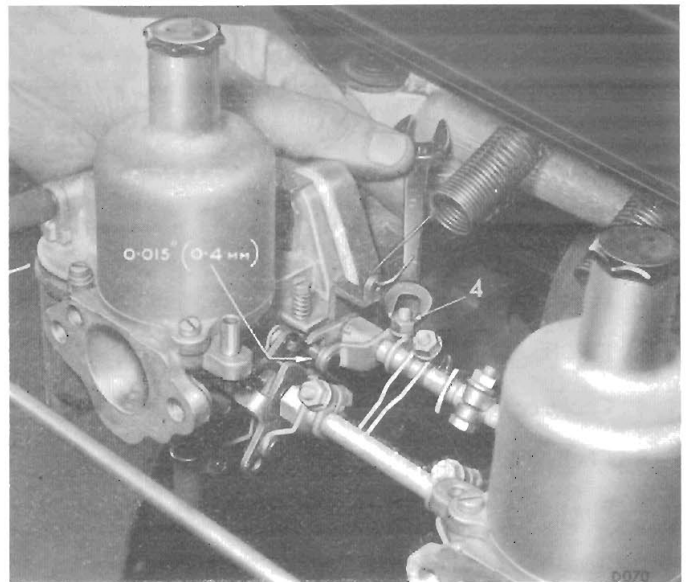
Adjusting throttle spindle clamps to give clearance of peg in fork
